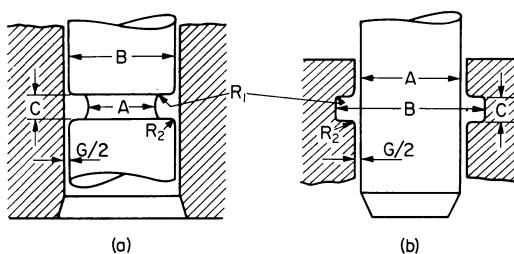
Dimensions of rectangular groove O-ring shaft seals (piston O-ring grooves): (a) external; (b) internal (Table 3.21). *Courtesy of Edwards³²⁹
